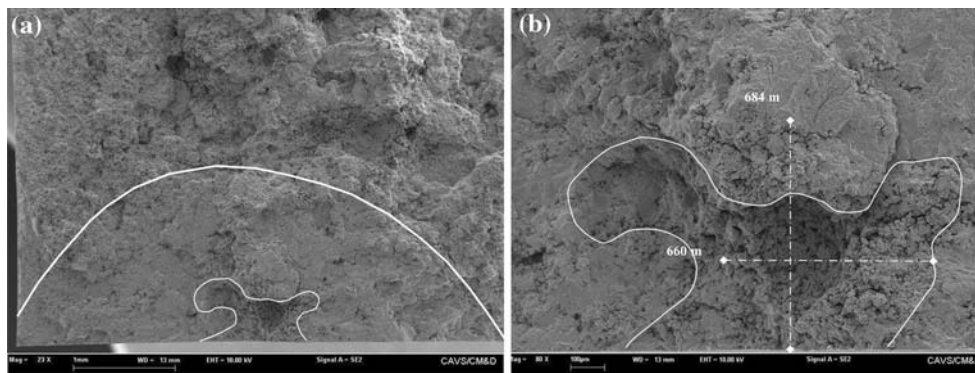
FEG-SEM fracture surfaces of sample Z_2 ($N_f = 2736$) cut from an AZ91 alloy plate showing (a) an overall view of the fracture surface and (b) a higher magnification of the region, including the casting pore that incubated the main fatigue crack. Note that the casting pore extends perpendicular to the sample free surface.
